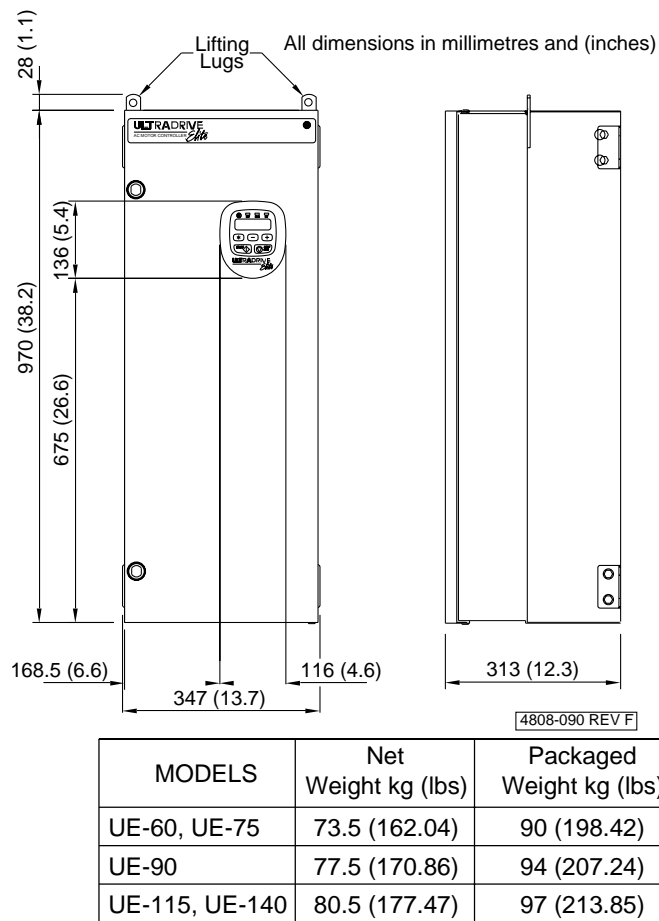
Ultradrive Elite Frame 4 Dimensions
